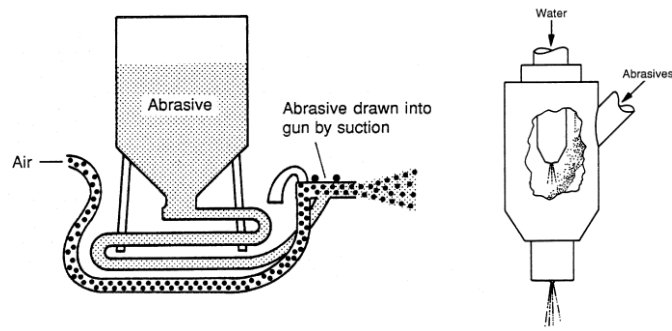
3). a:Hydraulic blasting system; b: Hydraulic blasting nozzle
